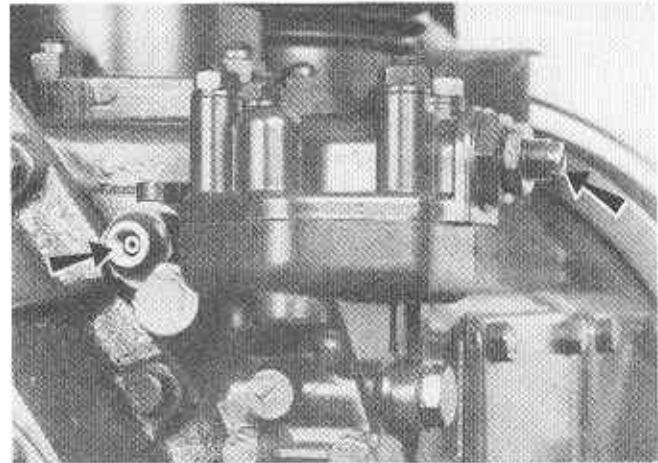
Oil Restrictor Location showing Restrictor (arrowed left) and Relief Valve (arrowed right)
